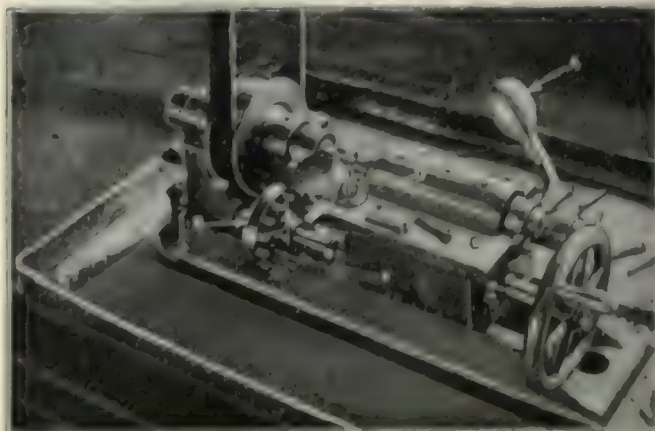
A SPECIAL COUNTERBORING MACHINE
